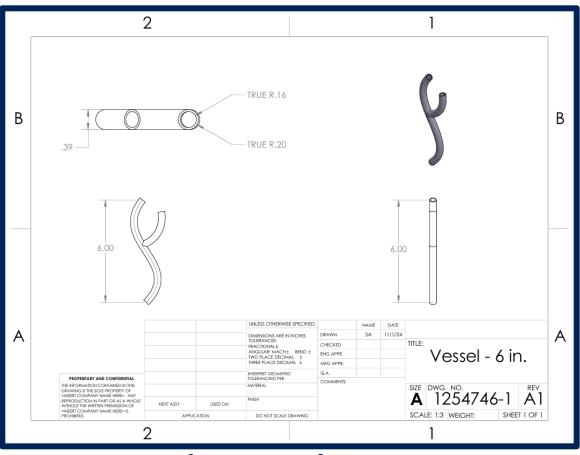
Drawing of Component [PN: 1254746-1_6 in. Vessel]
